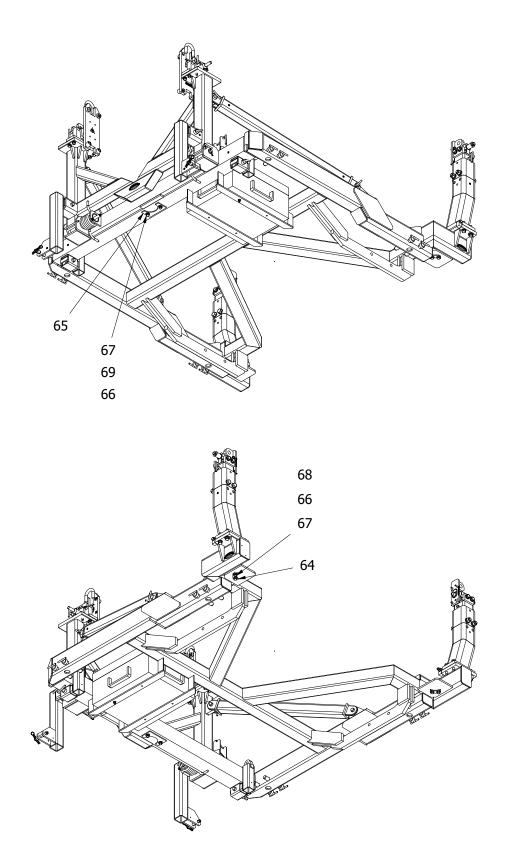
AGSE-E26202-S03 Cradle Assembly
